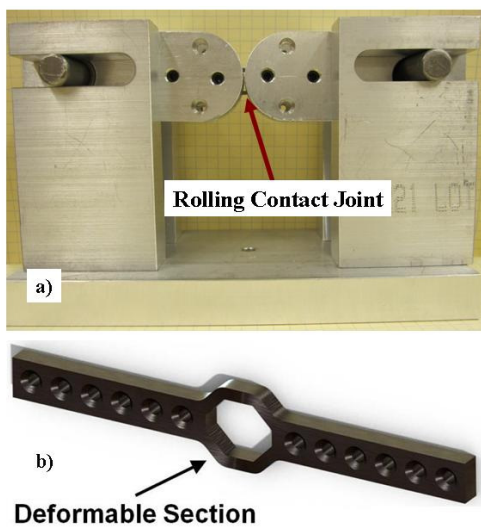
(a) rolling-contact joint testing apparatus; (b) adjustable bone plate [1].
